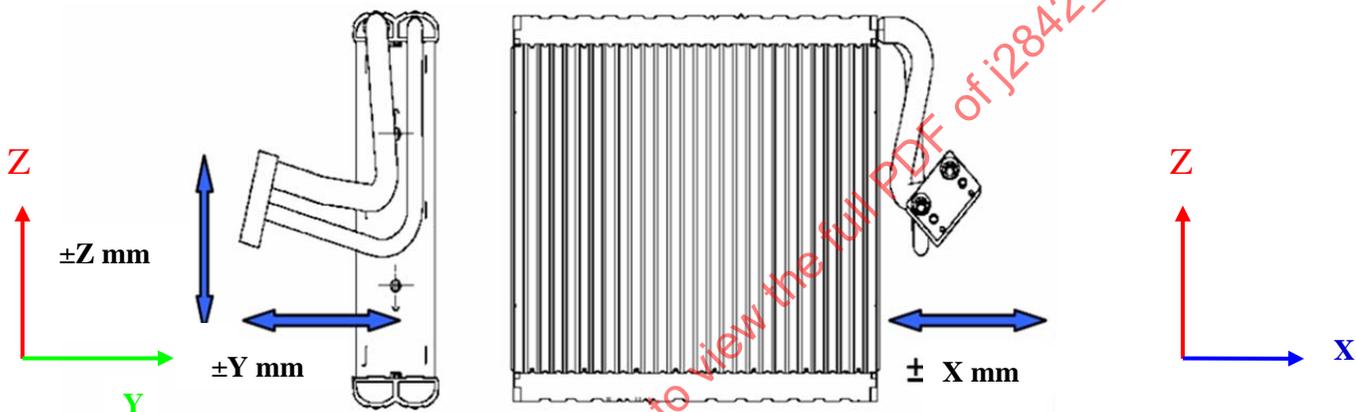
MULTI DIRECTIONAL PIPE BENDING FOR EVAPORATOR
